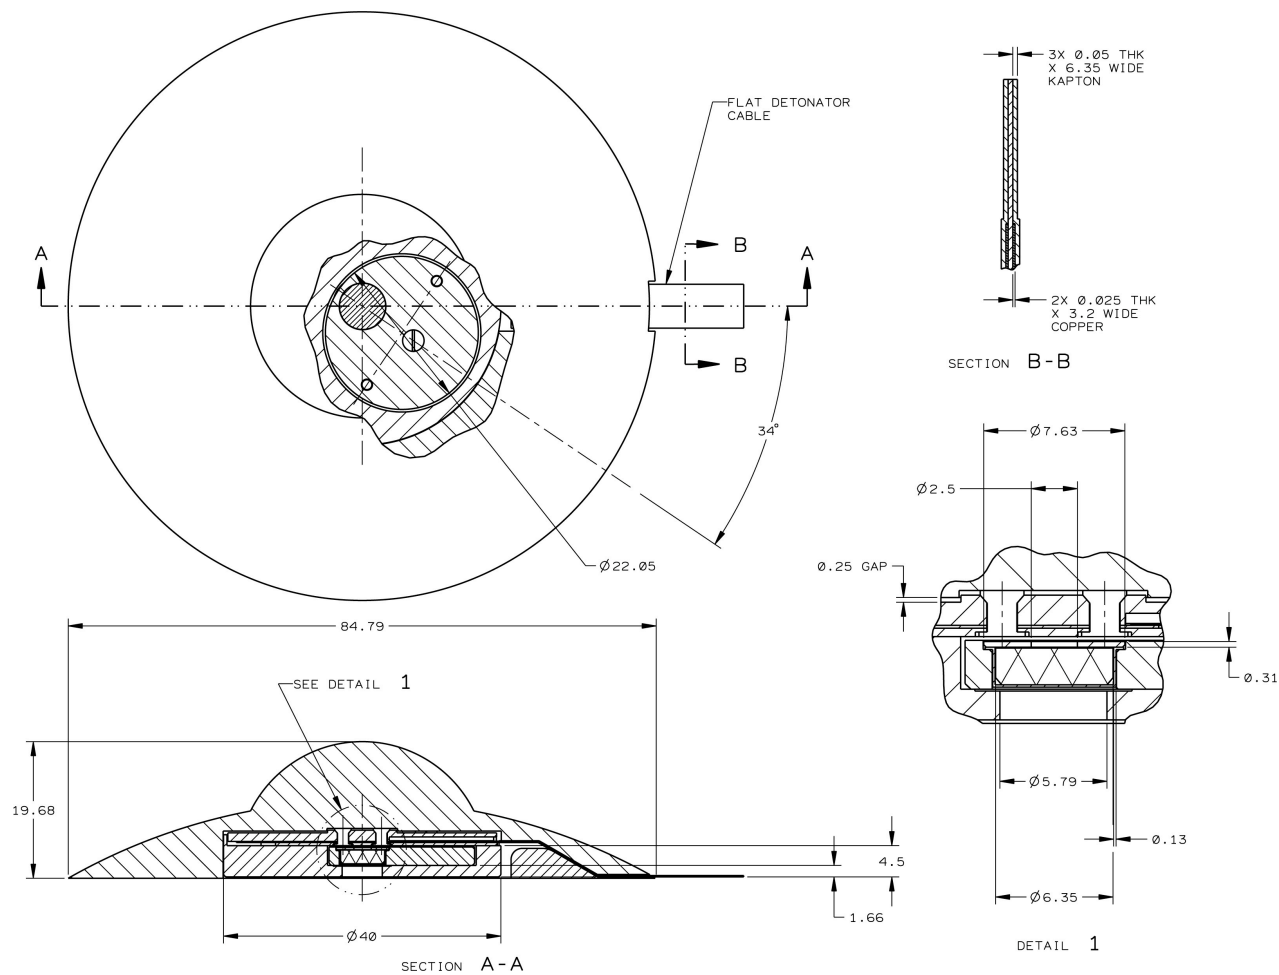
2021E PT7 Shadowplate: Full Assembly Top View and Cross Section
